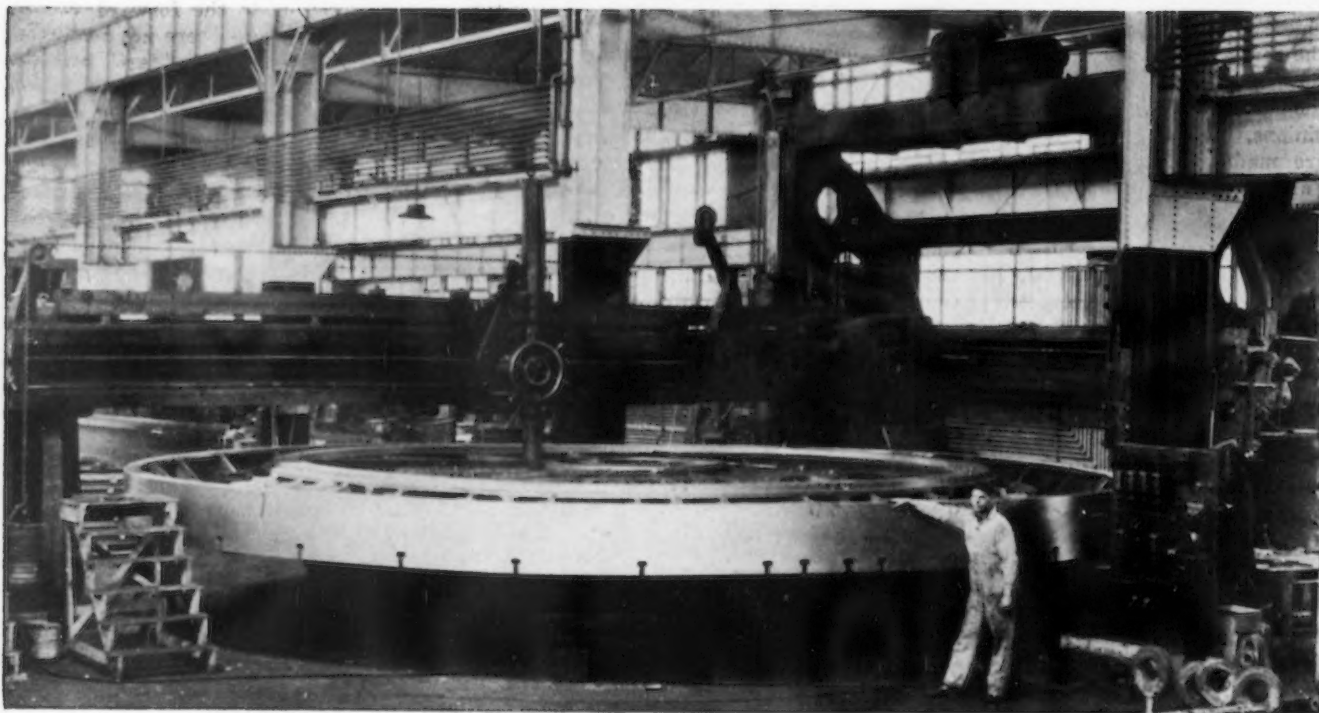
A 20-34 ft. extension boring mill equipped with reach arm was used for machining the table.
